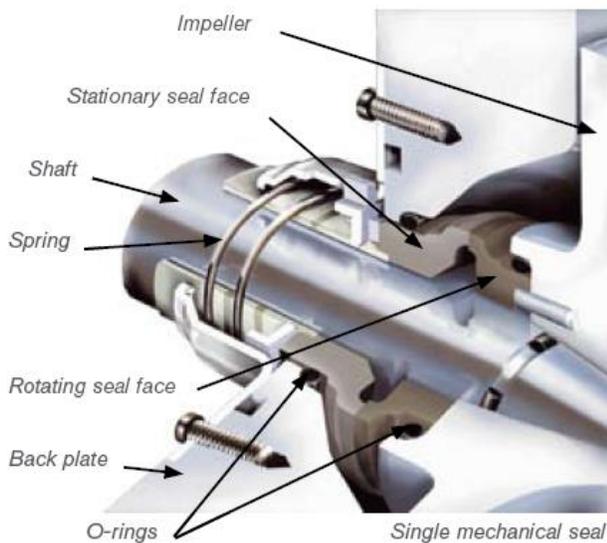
Shaft and seal. Image courtesy of SPX Flow, Inc.
